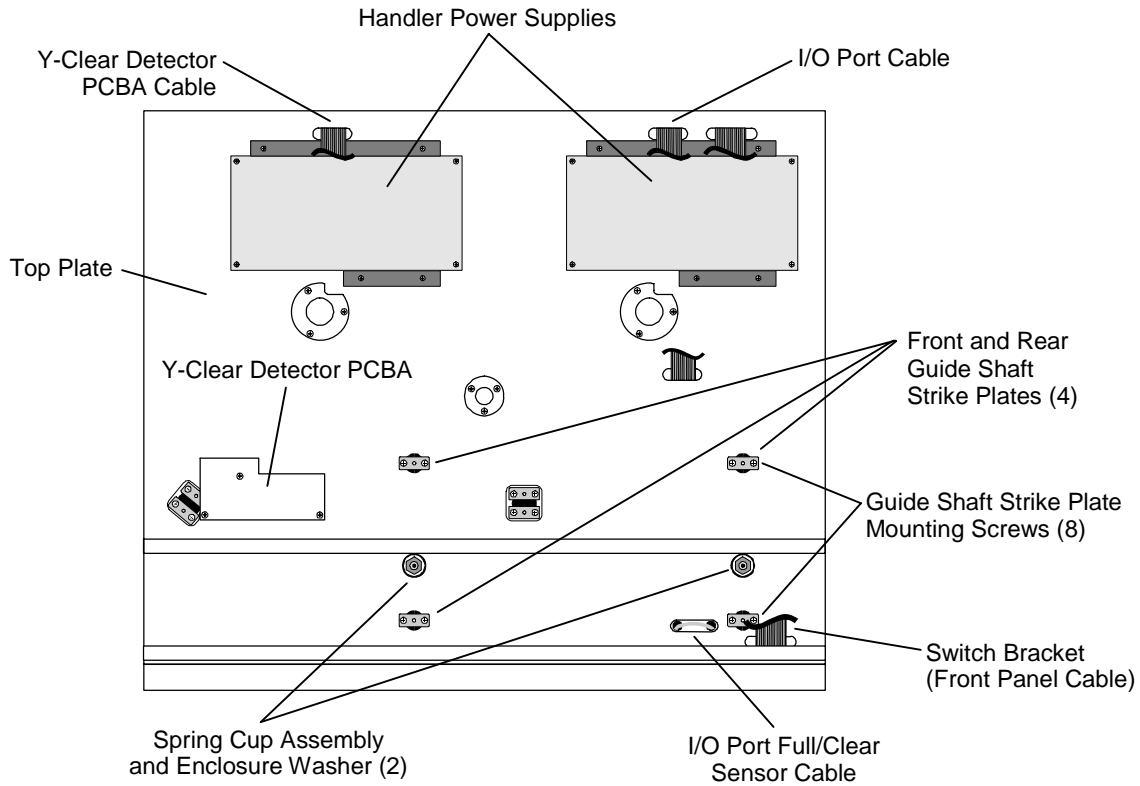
The TLS Cabinet – Top View of a TLS-412300/600 (Top Panel Removed)
